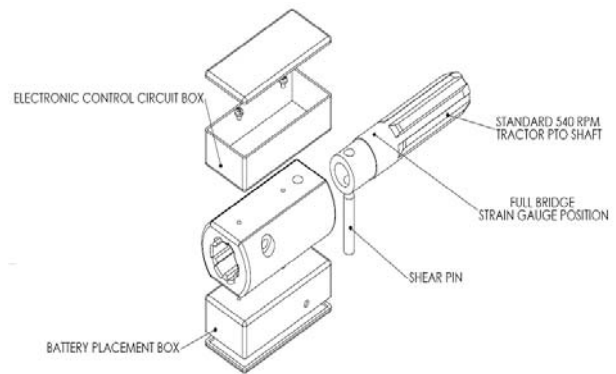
Detailed schematic drawing of mechanical parts and assembly
